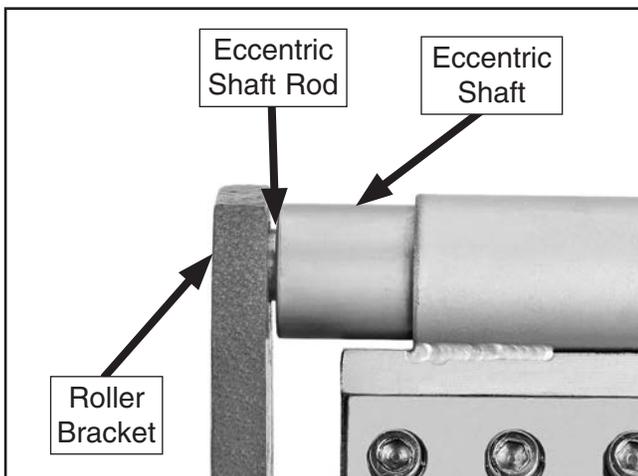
Eccentric shaft rod between the eccentric shaft and the frame.
